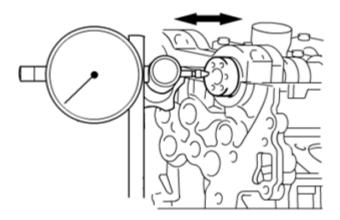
Measure Intake And Exhaust Camshaft Housing Thrust Clearance Courtesy of SUZUKI OF AMERICA CORP.
